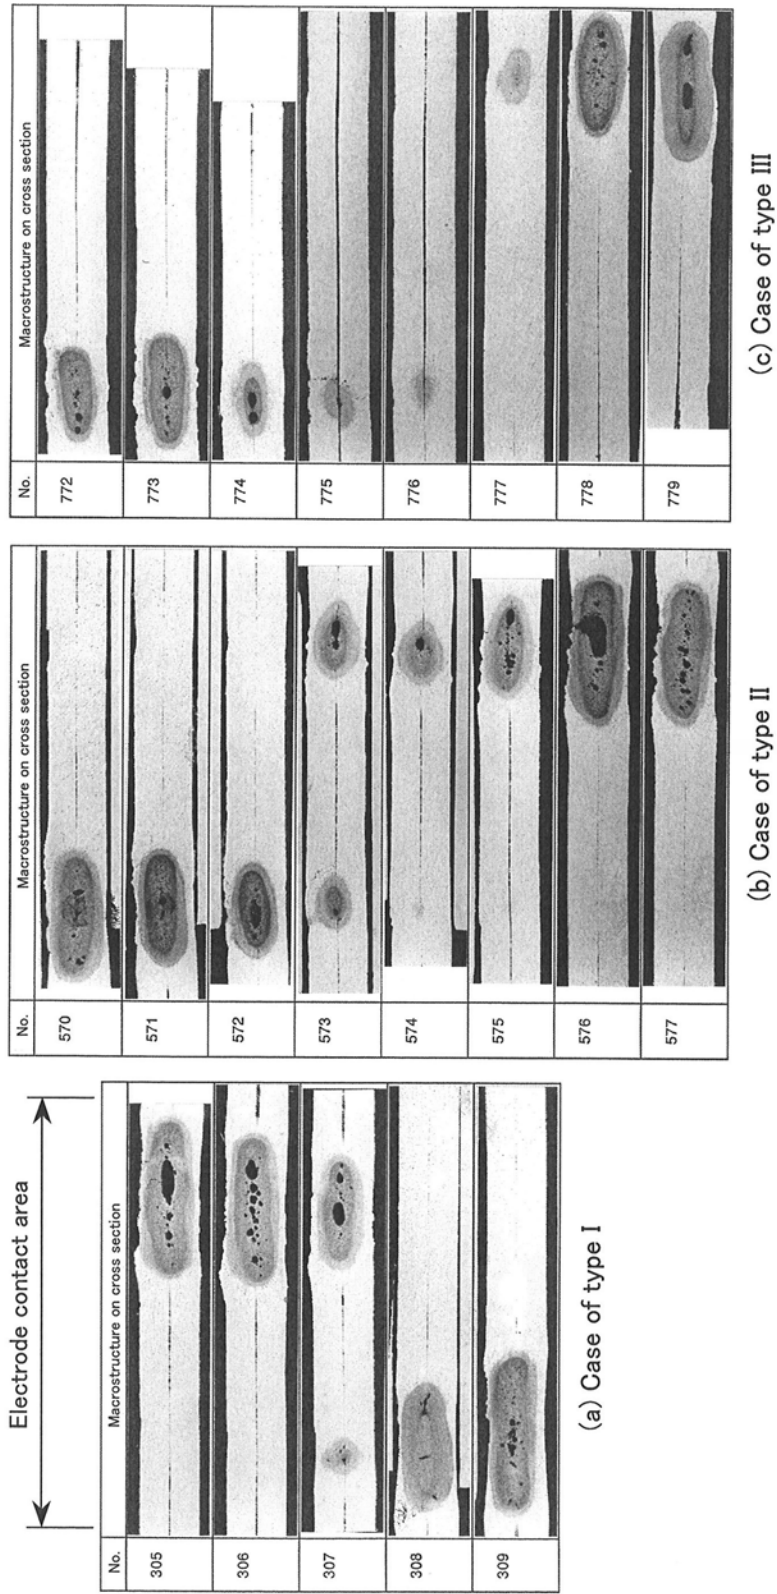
Changes of macrostructure in cross section of welded joint during consecutive welding of aluminum alloy sheets
